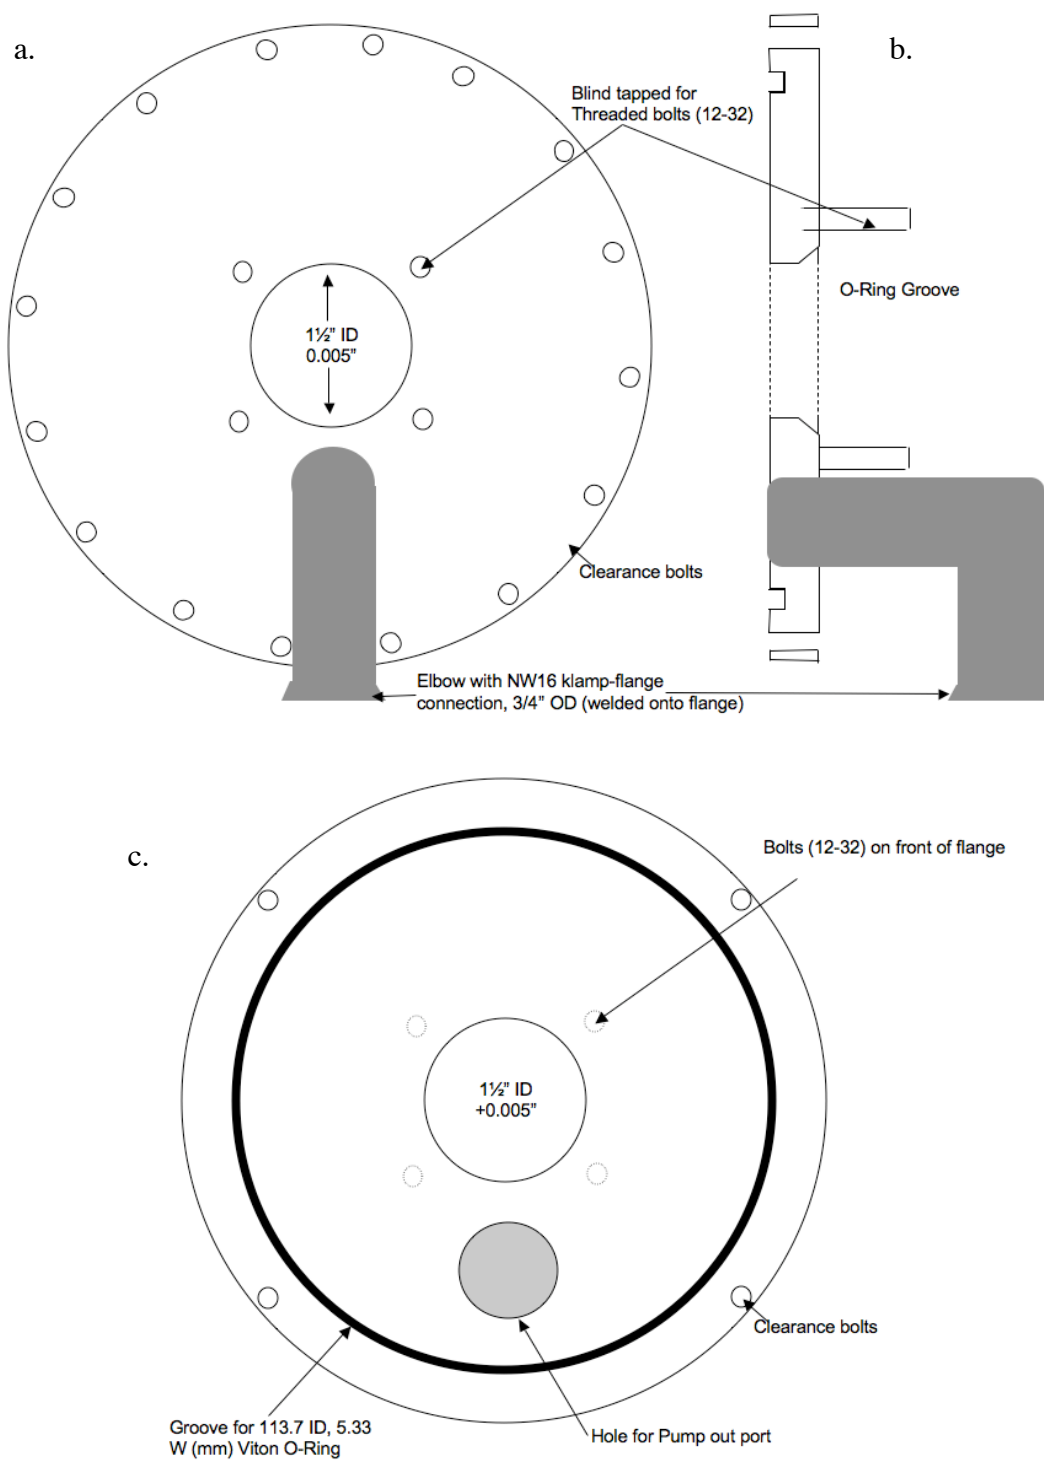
Front flange: (a) front (exterior), (b) side, and (c) back (interior) views.
